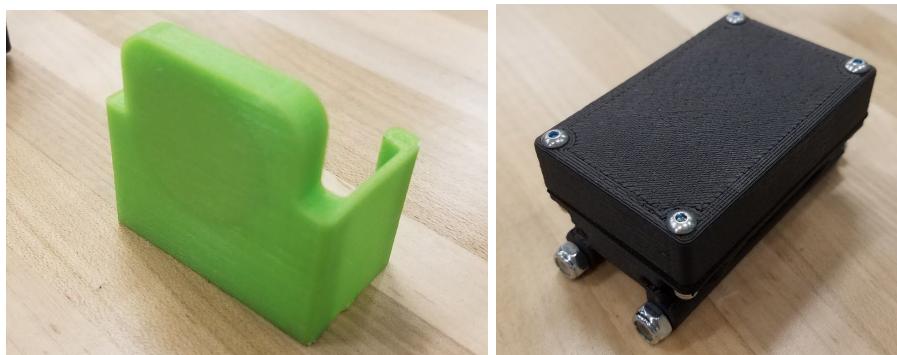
,22. Right: Battery Clip, Left: Enclosure Assembly
